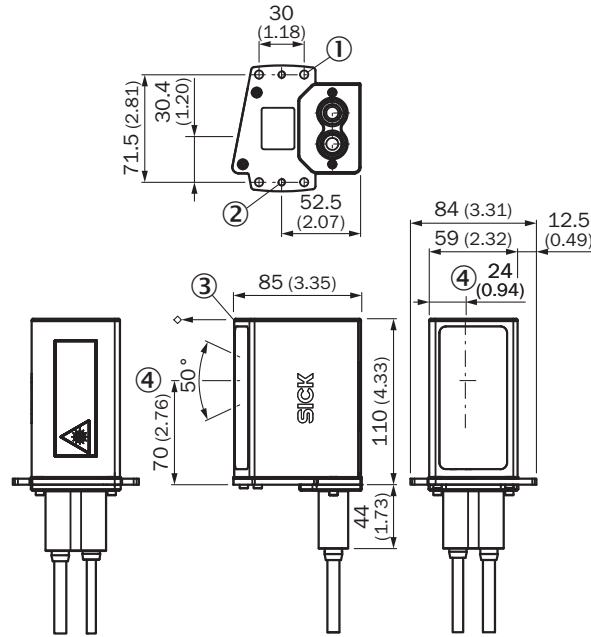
CLV62x: design and device dimensions of the IP69K protective housing with front reading window (dimensions in mm or inch)
